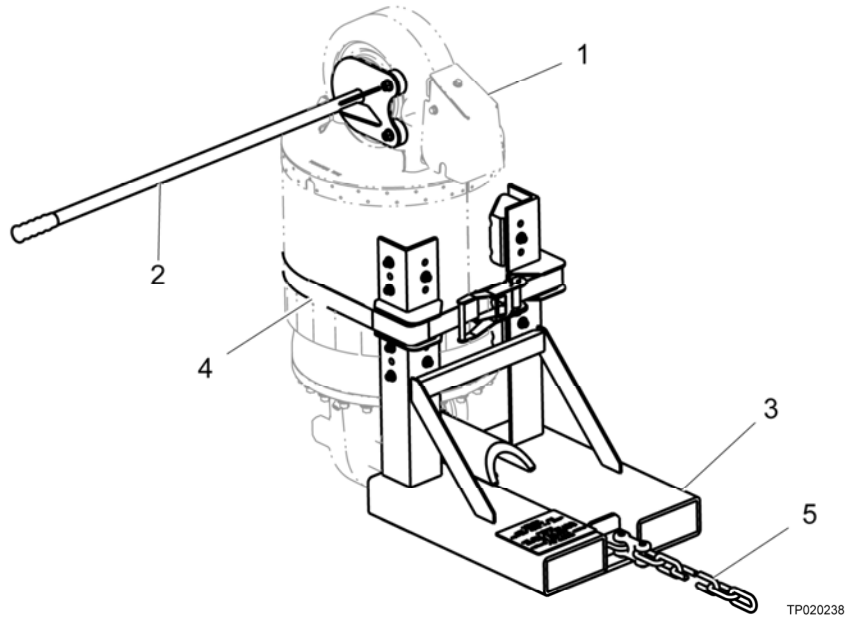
Fully Assembled Rear Suspension Handling Tool with Rear Suspension
